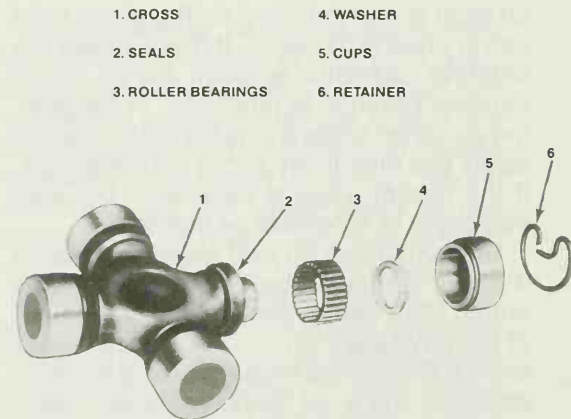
Overhaul kit for a simple universal joint. (Chevrolet Motor Division of General Motors Corporation)
